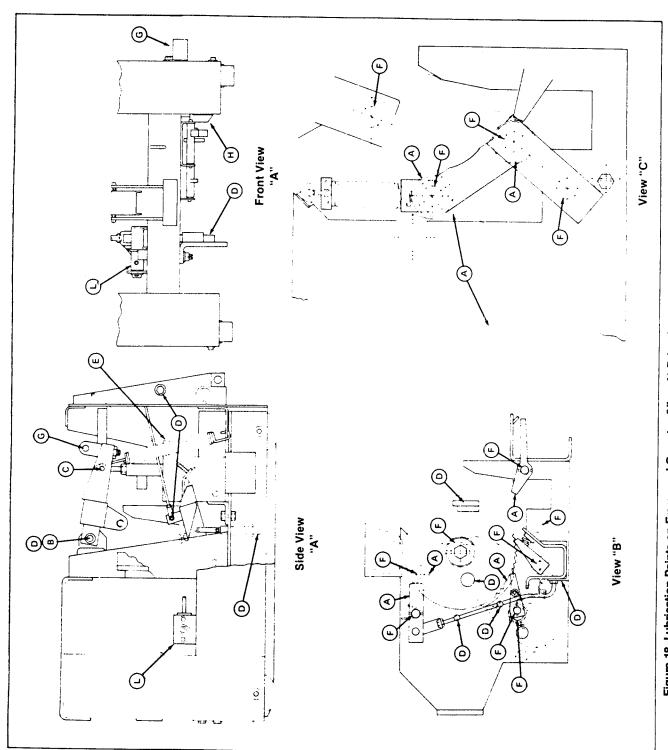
Lubrication Points on Frame and Operator (View A) Drive Assembly (View B) and Linkage Assembly (View C)
